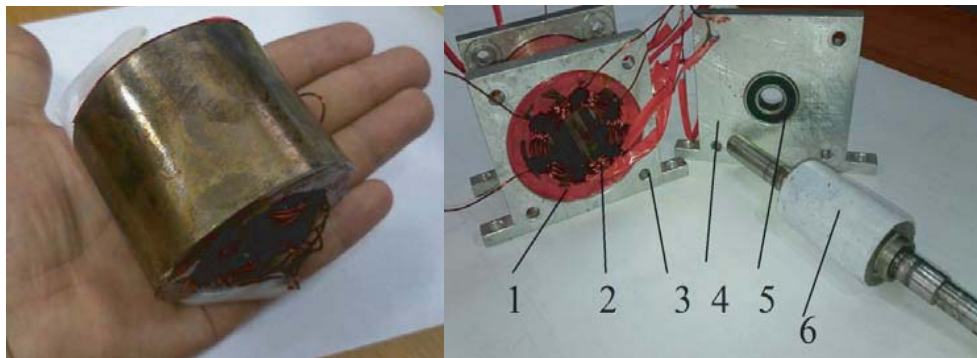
The HSEM prototype with AMM for an unmanned aerial vehicle: 1 — stator core; 2 — stator winding; 3 — housing; 4 — shield; 5 — bearing; 6 — rotor.
